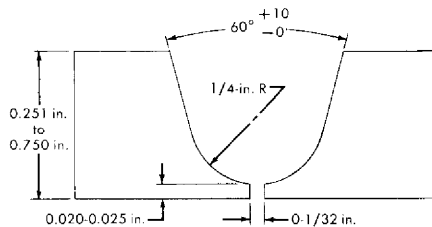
Typical setup of HRE-2 core tank Zircaloy-2 weldment.
